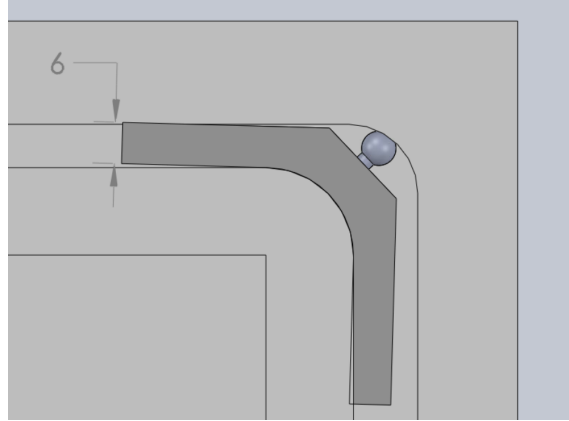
A close-up view of the ball-and-socket joint that connects the damper system to the outer tray of the incubator. All dimensions are in mm.
